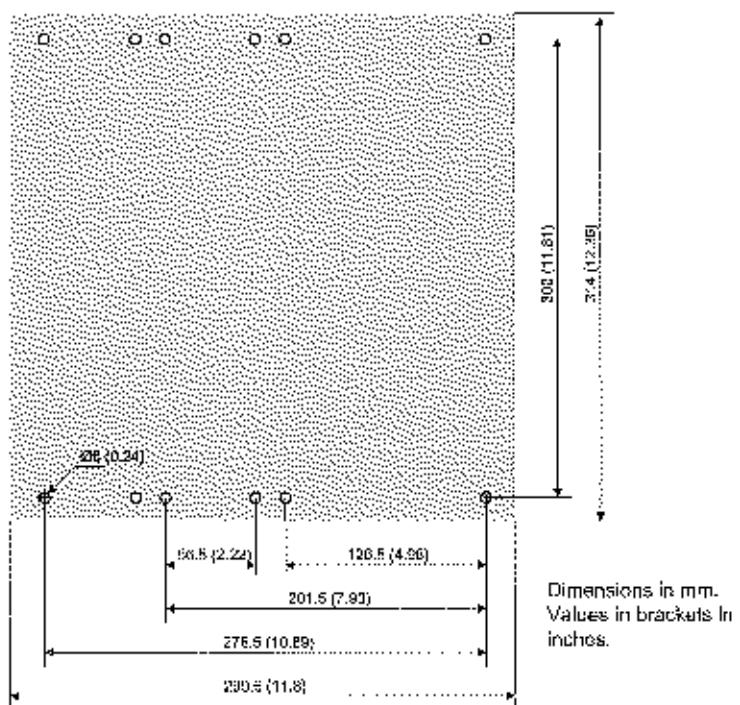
Drilling Pattern of a 2/3 Surface-Mounting Device – 1st Device Row
